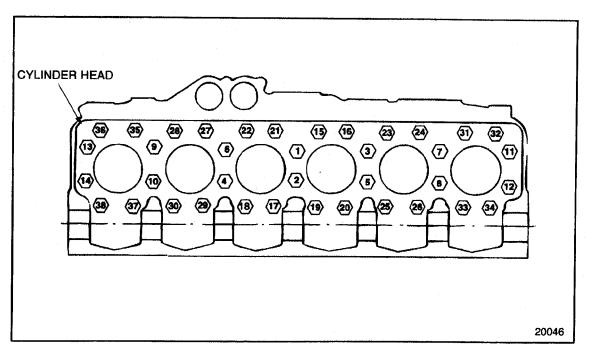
Cylinder Head Bolt Tightening Sequence
